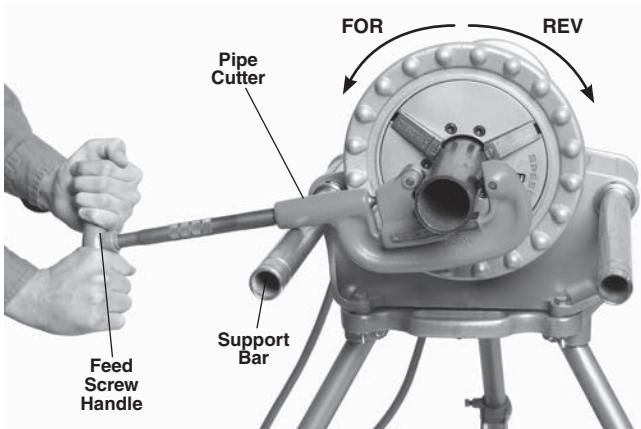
Cutting Pipe with Hand Cutter/Machine Rotation (Keep Cutter in Contact with Support Bar.)
